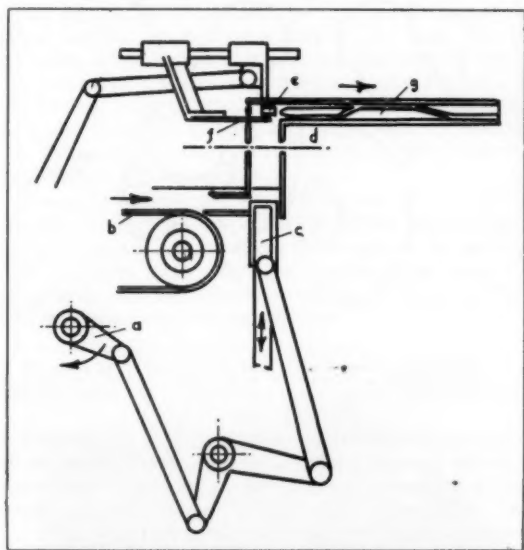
Single station type of machine which is generally driven by means of a crank. a, driving crank; b, feed belt; c, elevator; d, wrapper; e, ejector; f, folder; g, discharge channel
